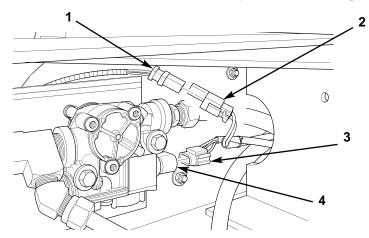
Connecting Rear Wheel Sensor and Modulator Harnesses.
